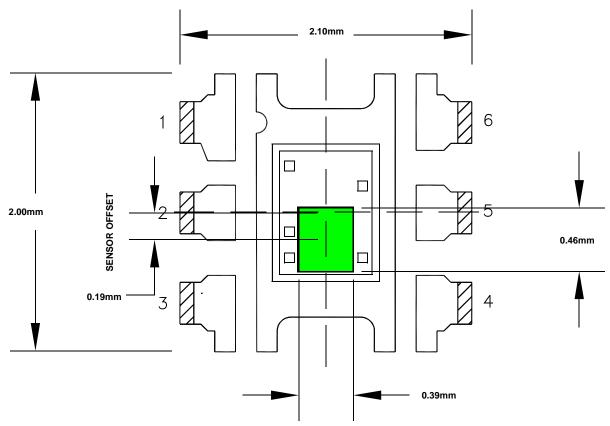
6 LD ODFN SENSOR LOCATION OUTLINE
